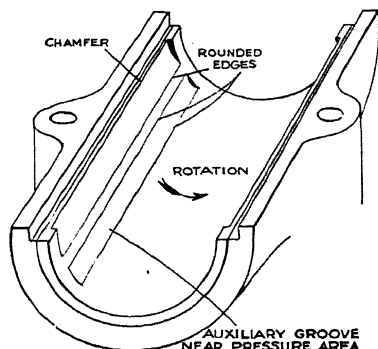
Correct grooving for slow speeds and heavy loads. (Courtesy Socony-Vacuum Oil Co.)
